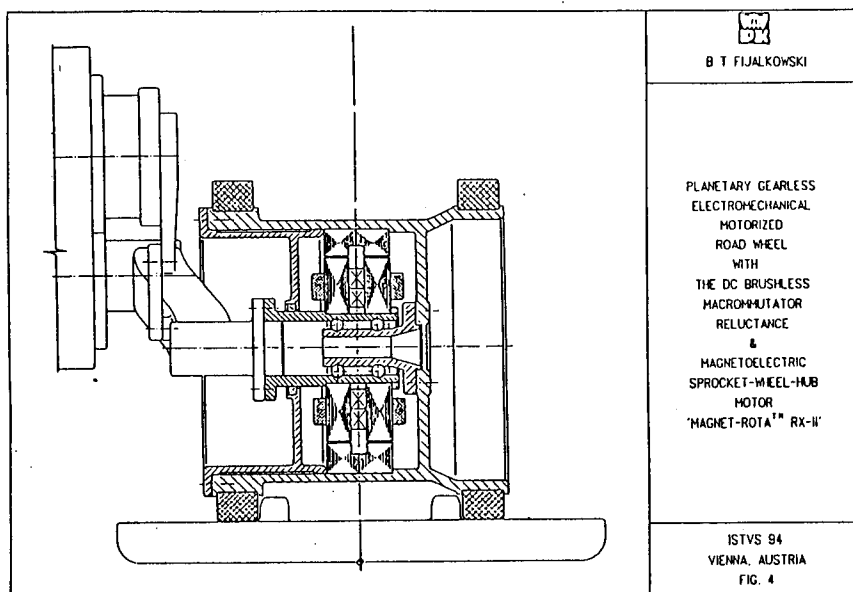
shows the principle layout of a planetary-gearless electro-mechanical sprocket- or tensioner-wheel with the brushless DC macrocommutator reluctance & magnetoelectric (unwound MSI outer rotor and wound & IPM inner stator) wheel-hub motor MAGNET-ROTA™ RX-II and Figure 4 - the principle layout of a planetary-gearless electromechanical road wheel with the same brushless DC macrocommutator reluctance & magnetoelectric wheel-hub motor MAGNET-ROTA™ RX-II conceived and newly designed by the author.
